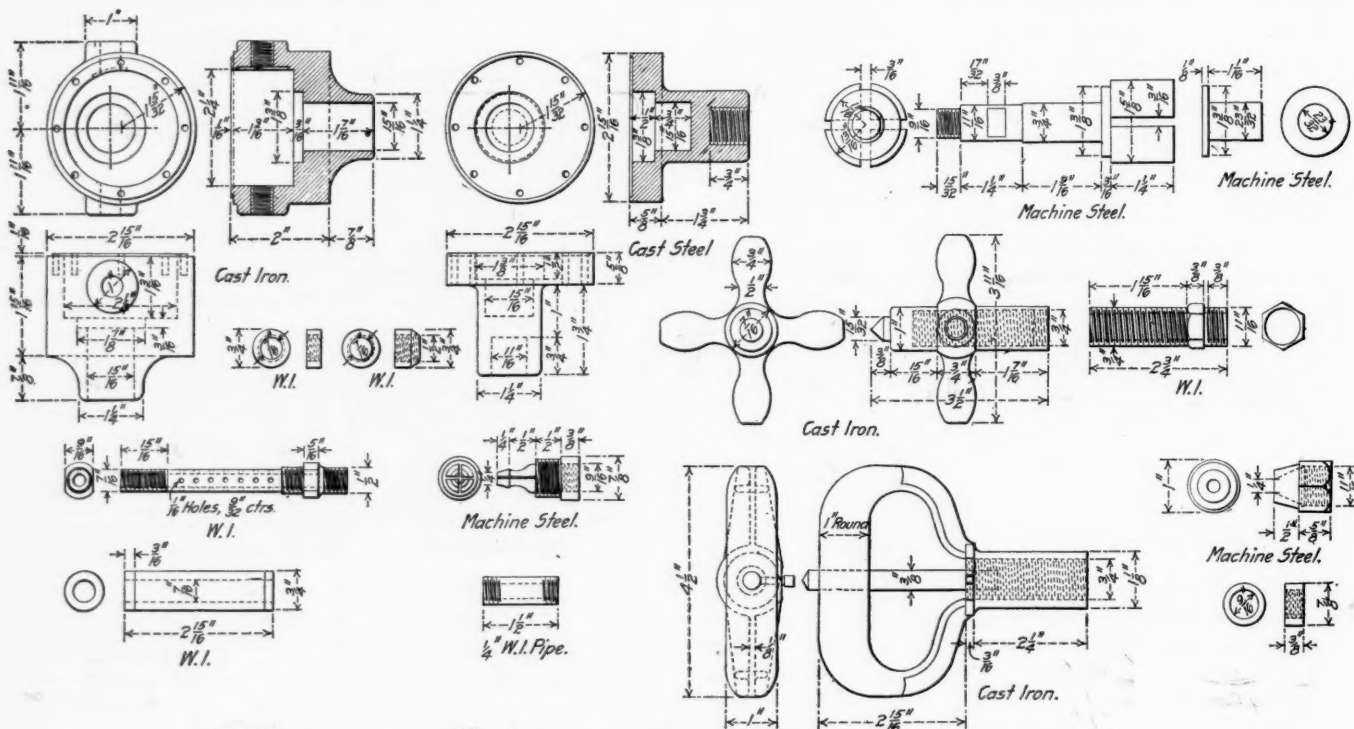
Details of Rotary Air Motor for Drilling Tell-Tale Holes.
